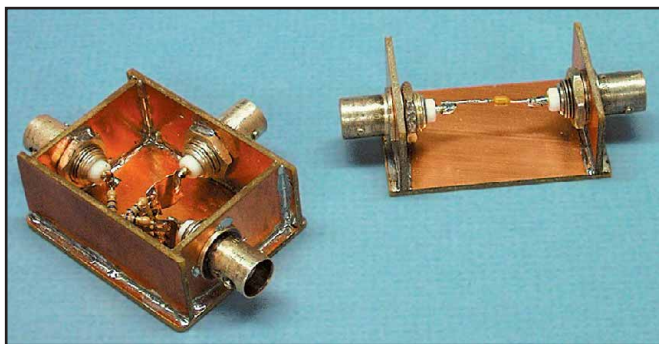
Two examples of simple printed circuit board structures made as described herein. The temporarily uncovered box is a 50 Ω power splitter. The “U” shaped assembly is a component test jig.
